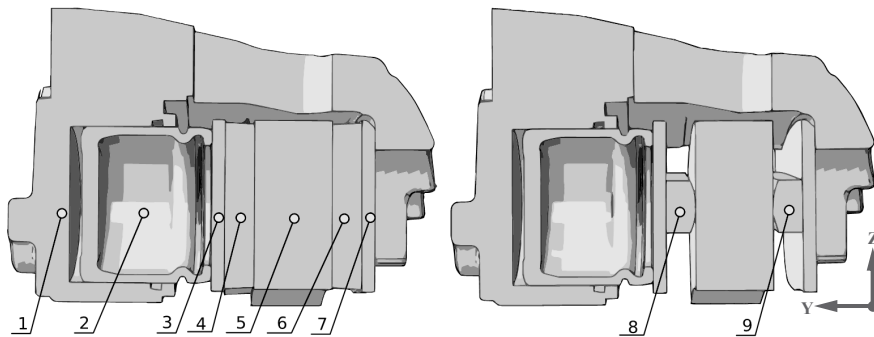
Assembly of the floating-caliper brake after part simplification.
